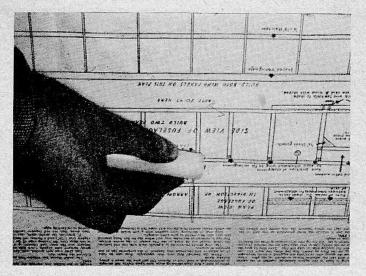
An alternative method to Fig. 1 is to rub the drawing with candle wax or soap.
